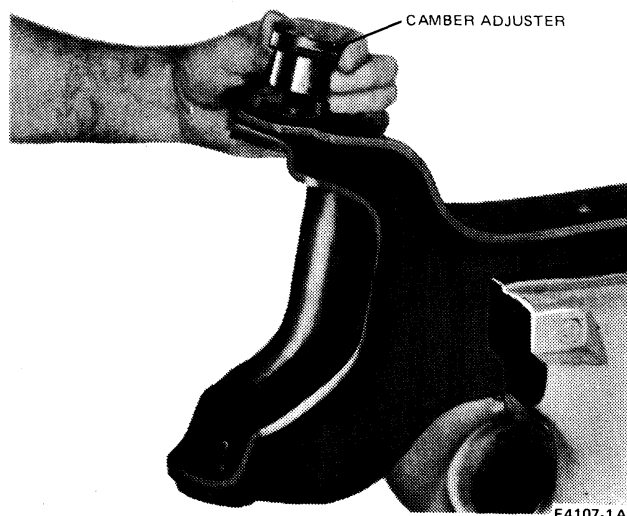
Front Driving Axle—F-250-350 (4x4)
